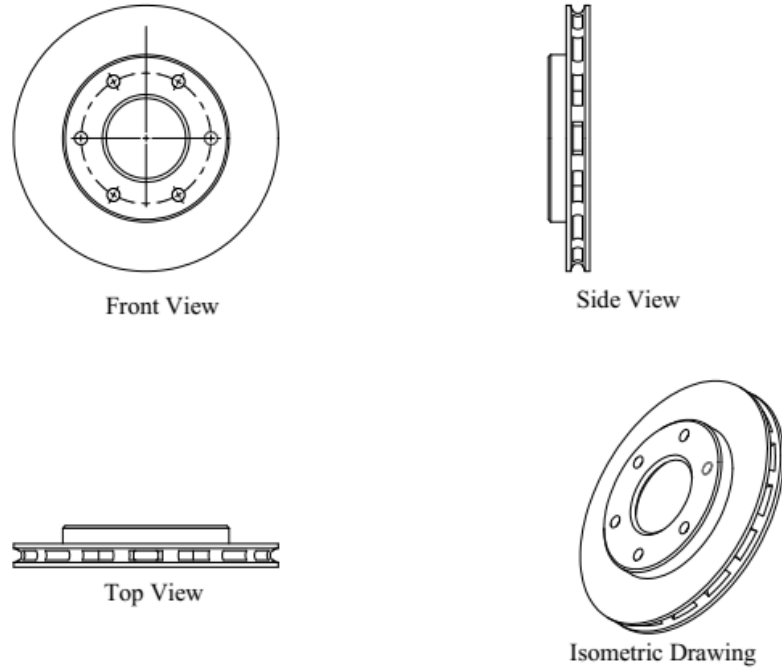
2D & 3D drawing of Disc Brake Rotor
